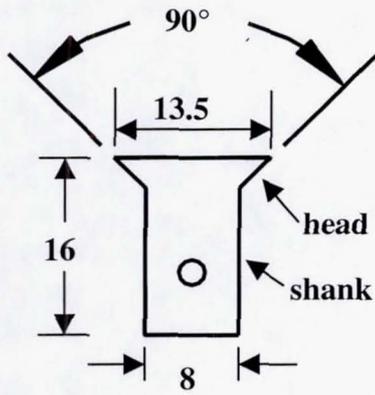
Schematic of SiC/SiC fasteners. Dimensions are in mm.
